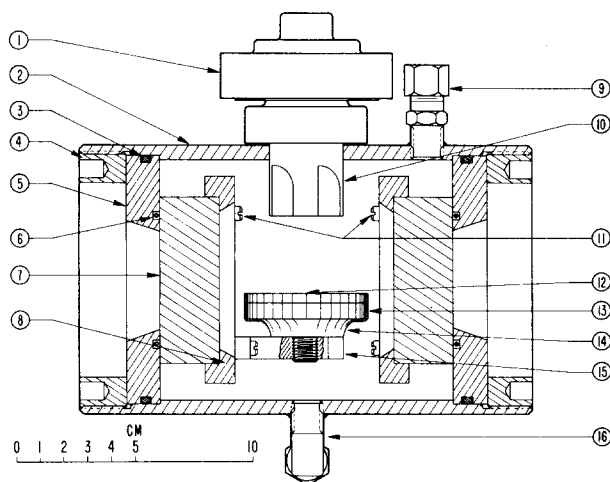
Scale drawing of high pressure visual cell. 1—Magnetic drive; 2—reactor cell body (Hastelloy B); 3—O-ring seal (Parker #2-241, ethylene-propylene); 4—threaded retainer ring (Hastelloy B); 5—window end plate (Hastelloy B); 6—O-ring seal (Parker #2-137, ethylene-propylene); 7—tempered plate glass window, 2.54 cm thick; 8—window retainer ring (Hastelloy B); 9—gas line connection (Hastelloy B); 10—impeller (Teflon); 11—window mounting screws (Hastelloy B); 12—sample; 13—shrinkable tubing (Teflon); 14—sample holder (Teflon); 15—sample holder base (Teflon); 16—liquid inlet (Hastelloy B).
